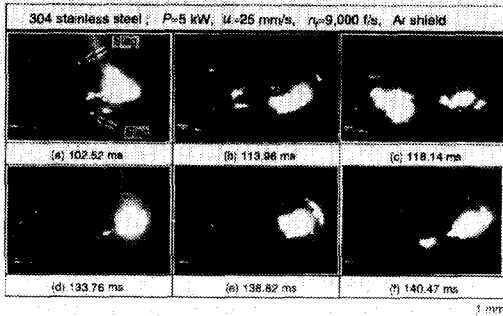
Video frame representing slag motion pattern on the rear part of Weld pool
